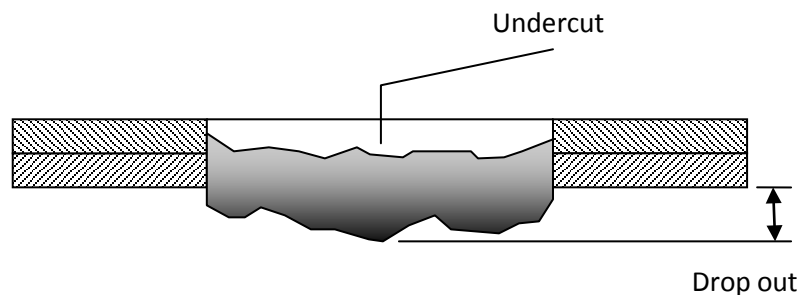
Schematic: longitudinal weld section showing undercut and drop-out
